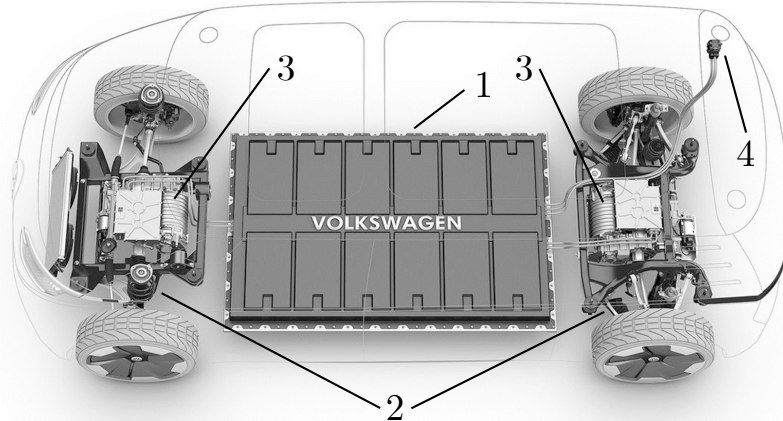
Example of a typical EV component packaging, [VOL19a].
